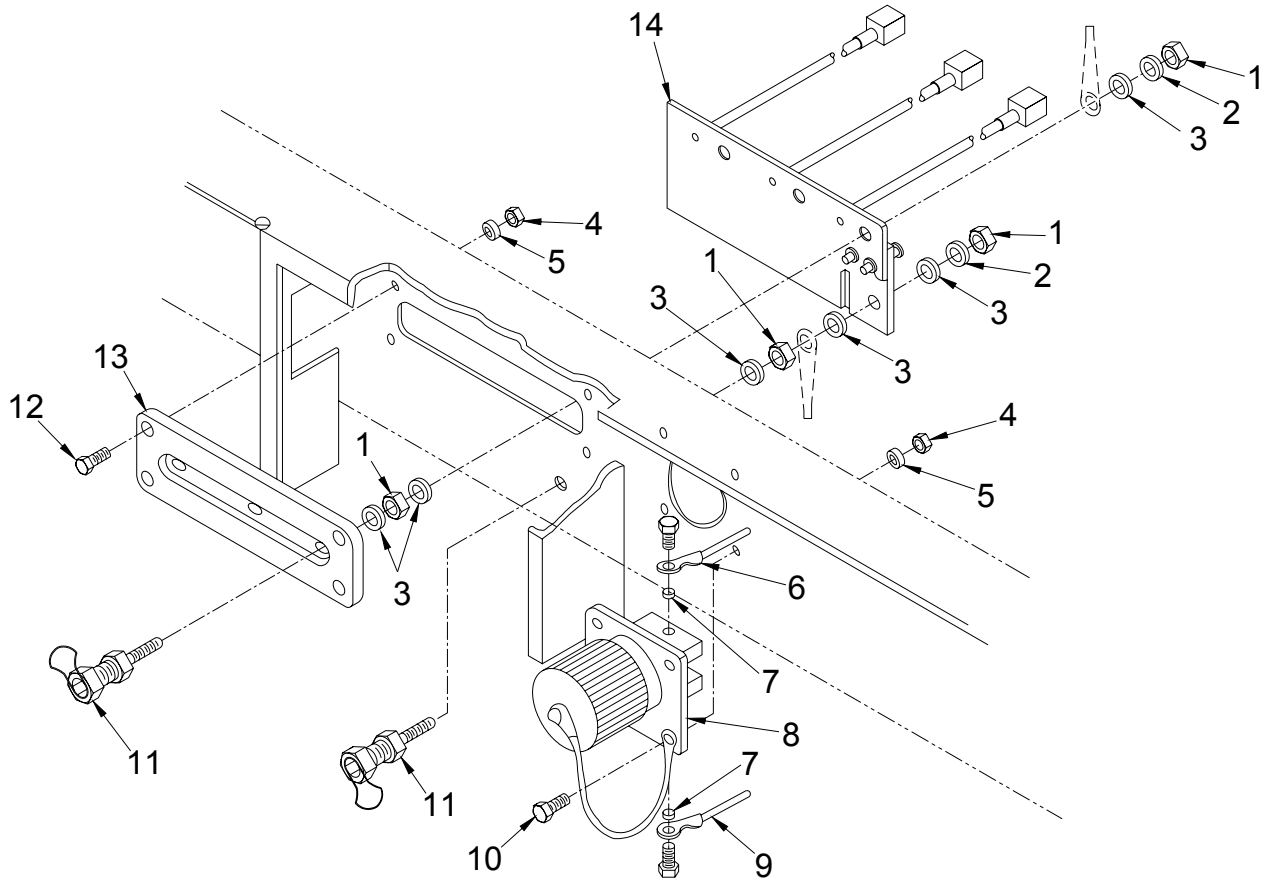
FRAME AND HOUSING ASSEMBLY/NATO SLAVE RECEPTACLE
